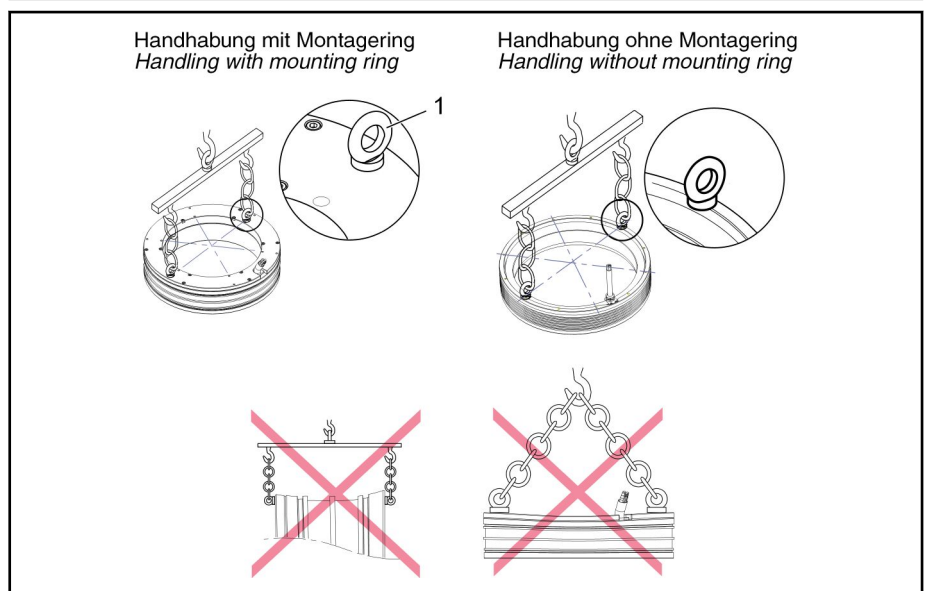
Lifting eye bolt on MST450E with housing (example)
